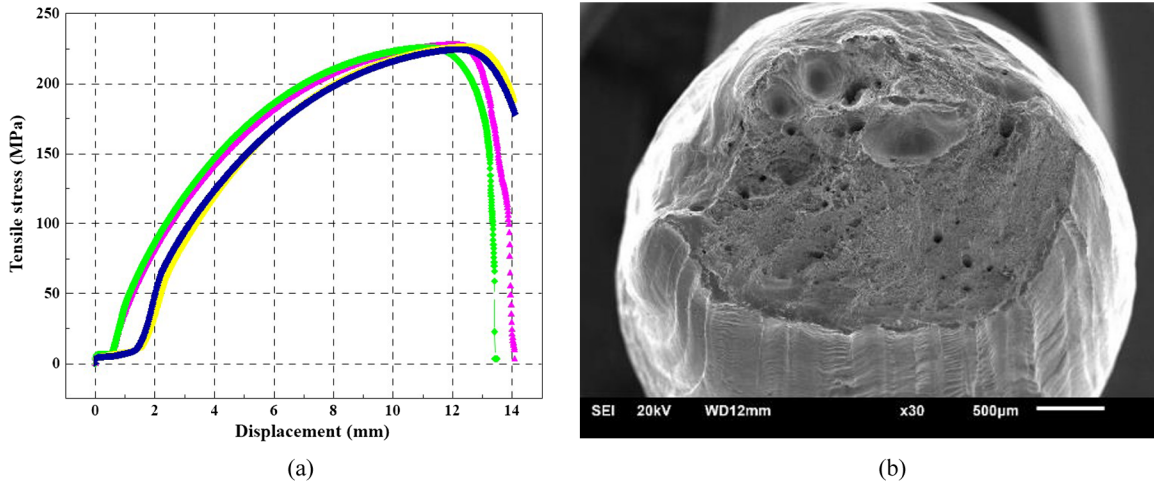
The tensile strength tests of the welded samples (a) and a cross section of a fracture (b).
